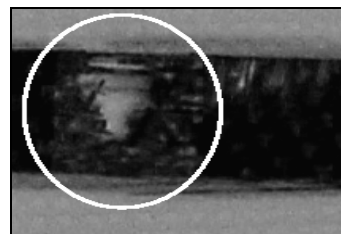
Delamination and failure fracture surface on elevated temperature.
